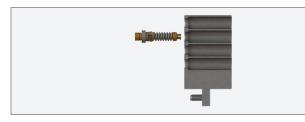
Contact Installation to Connector Module (by hand) Uses Tool PN: 500-38-008
